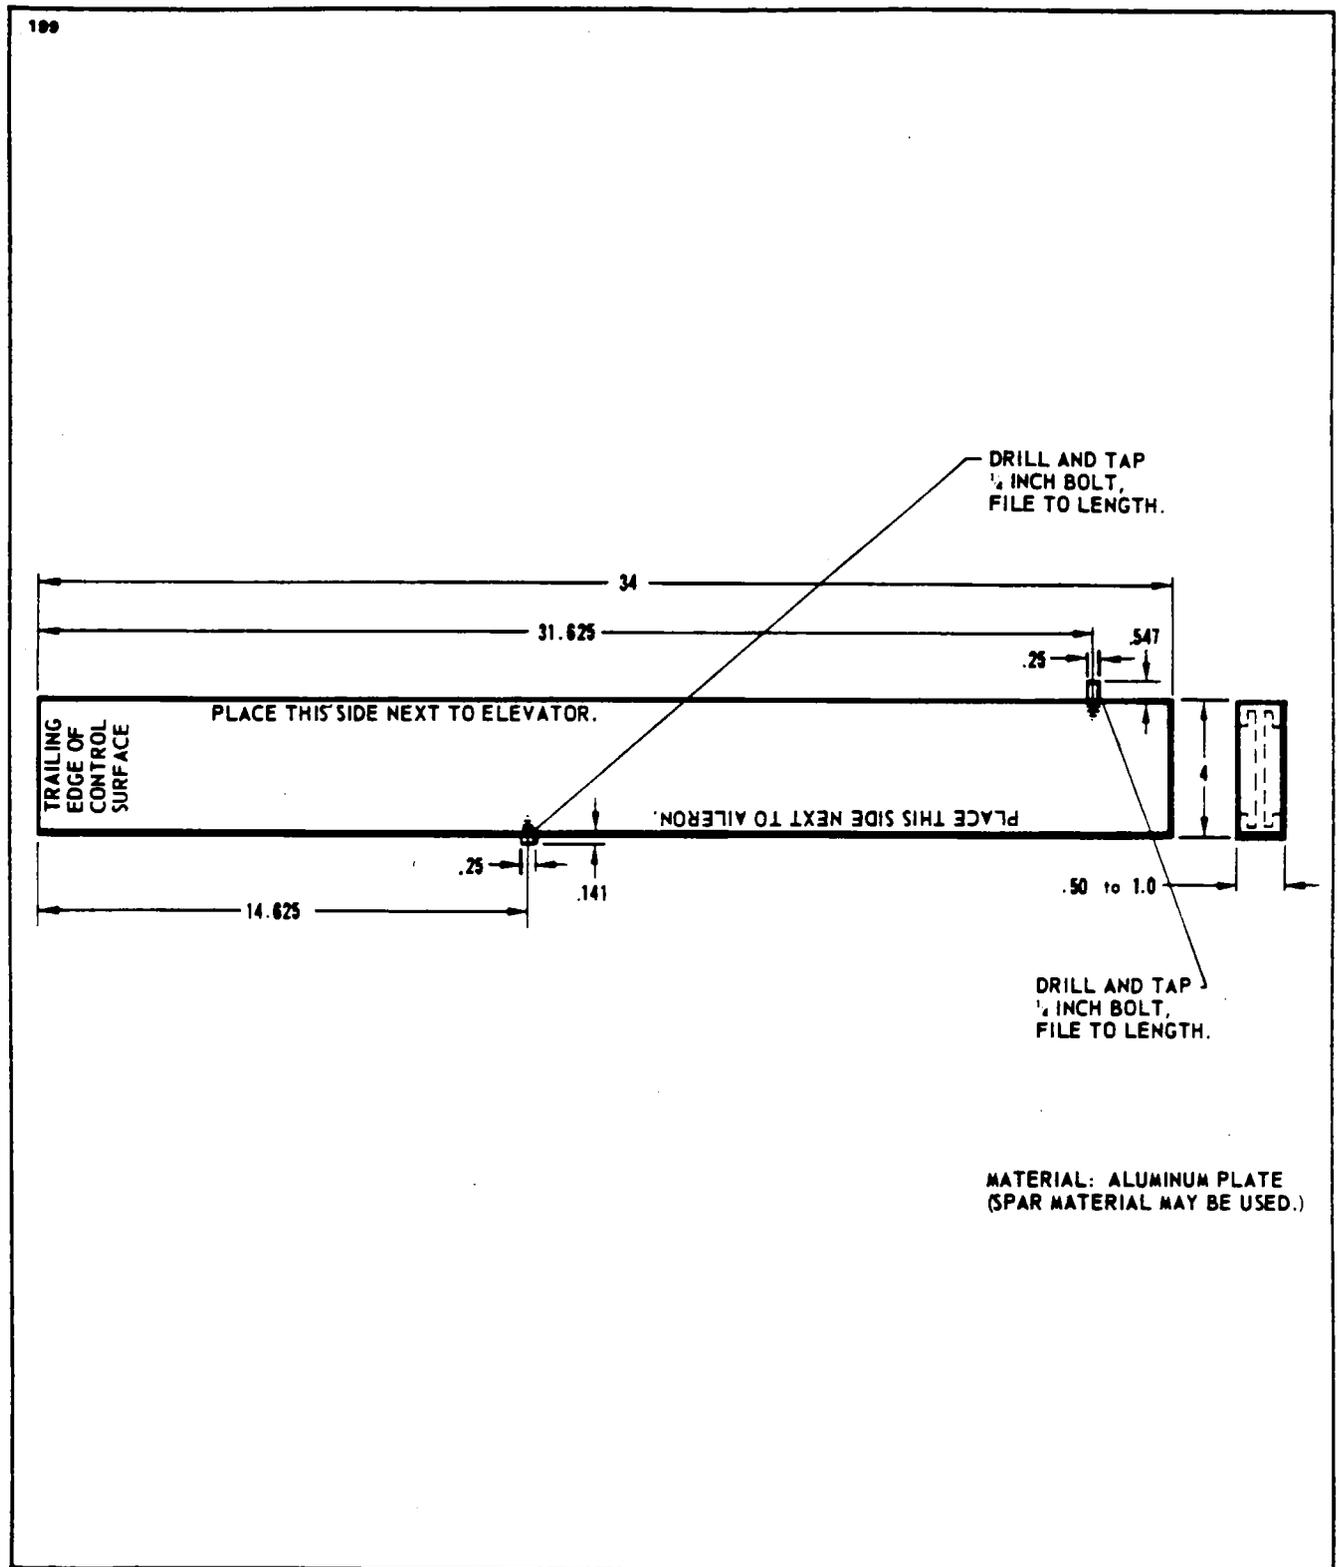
Fabricated Aileron and Elevator Rigging Tool
